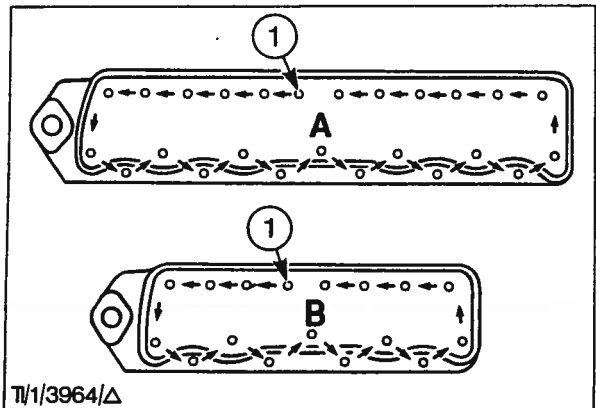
Cylinder Head Bolts Tightening Sequence
